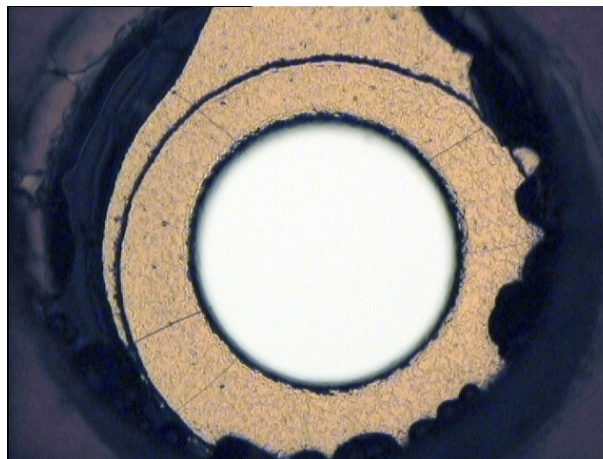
As-received condition of the PCB, showing visible cracking on the annular rings (~120x magnification)
